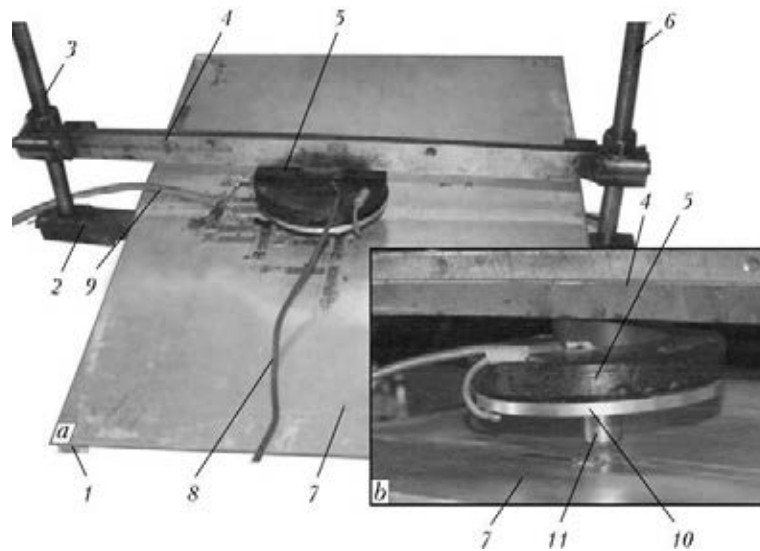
Appearance of fixture for EDT of AMg6 alloy welded joint (a) and inductor positioning on the weld (b) (for 1–11 see the text)
